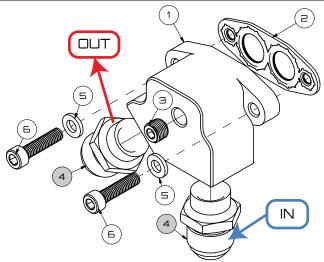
Rear Sump Assembly, Parts & Plumbing
